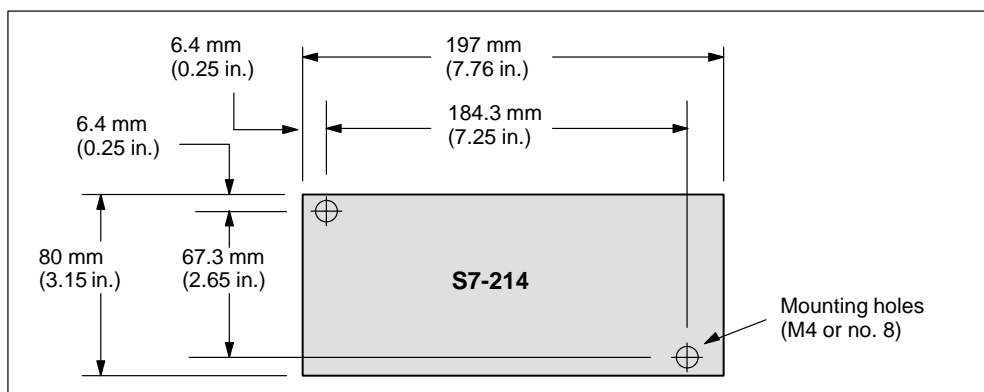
Mounting Dimensions for an S7-214 CPU Module
